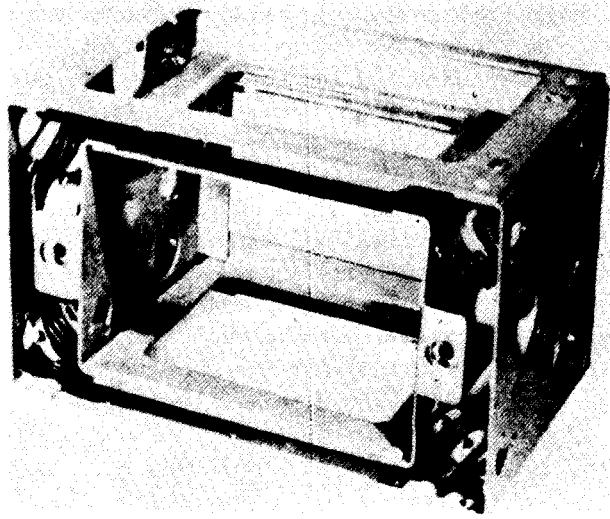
Mounting System Using Springs With Wire Mesh Damping
